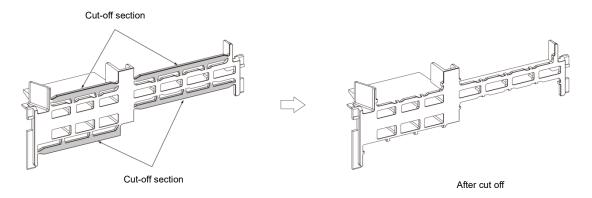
Wiring Guide (FRN0072E3S-4G)
